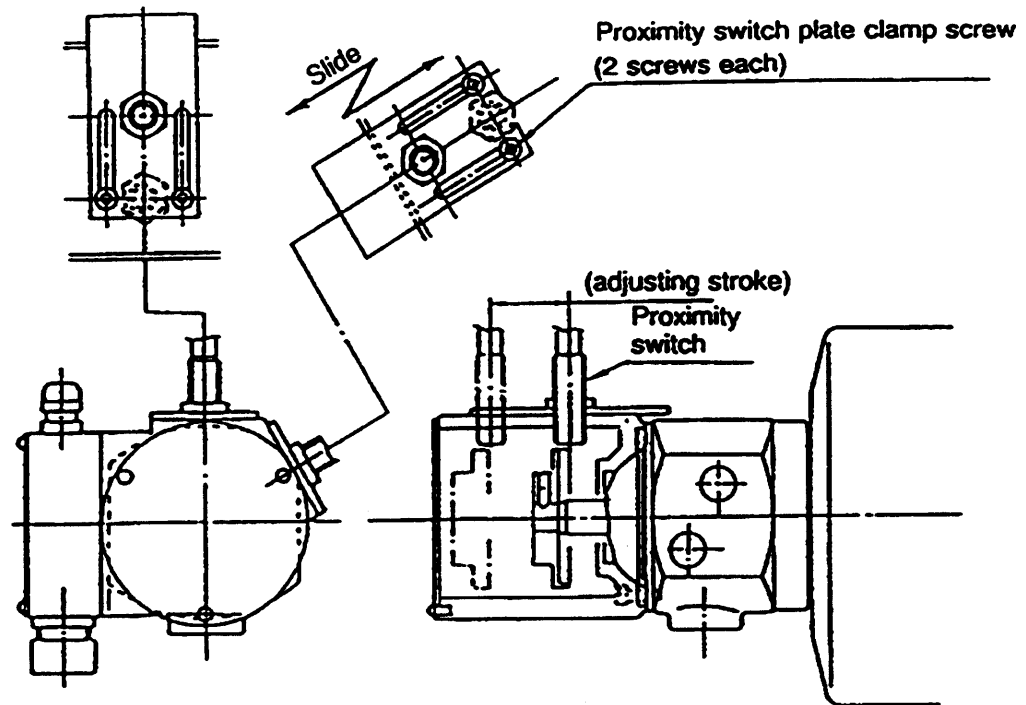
Adjusting Proximity Switch Position (for Solid Cylinder)
